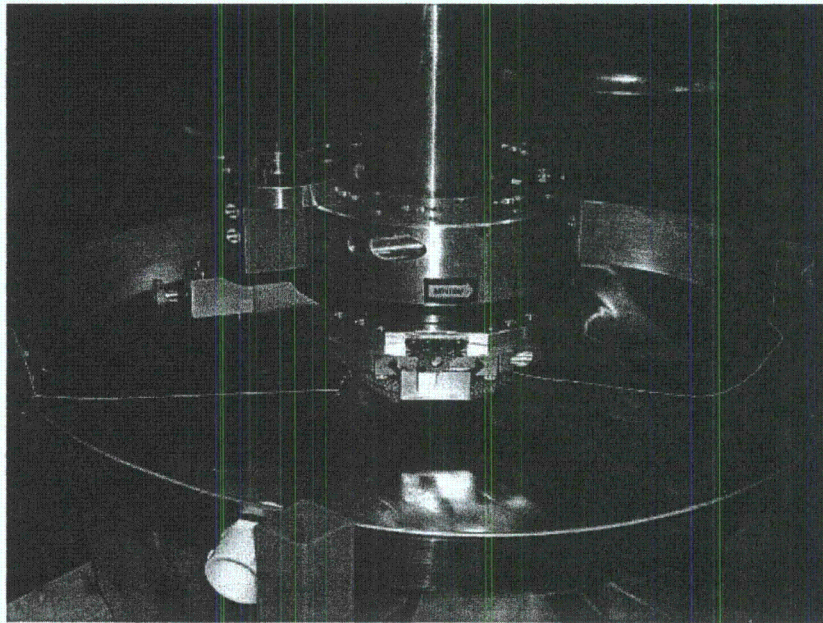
Nozzle 63 with Hydraulic Rotary Pipe Cutting Tool
